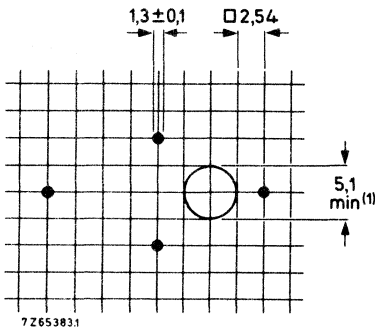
Hole pattern for mounting on a printed-wiring board.
